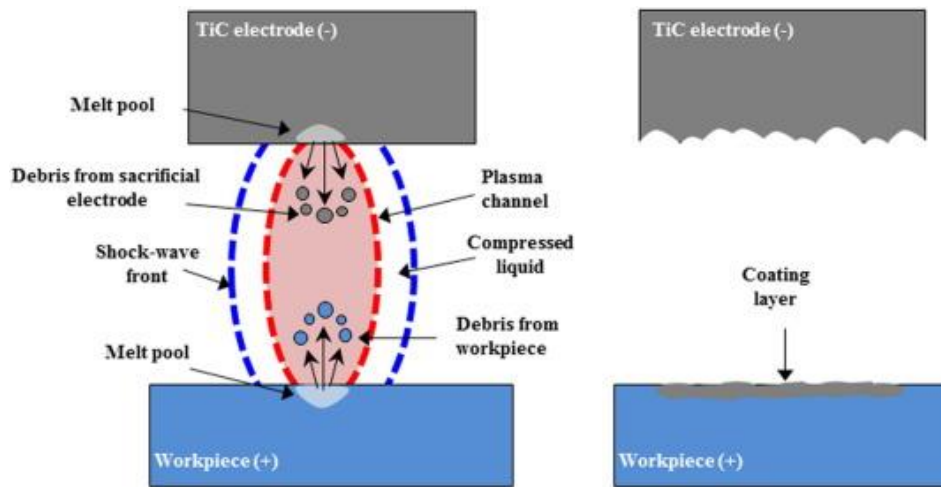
Schematic representation of the EDM mechanism: a) plasma channel formation; and b) workpiece surface modification/coating, following many sparking events [32]
